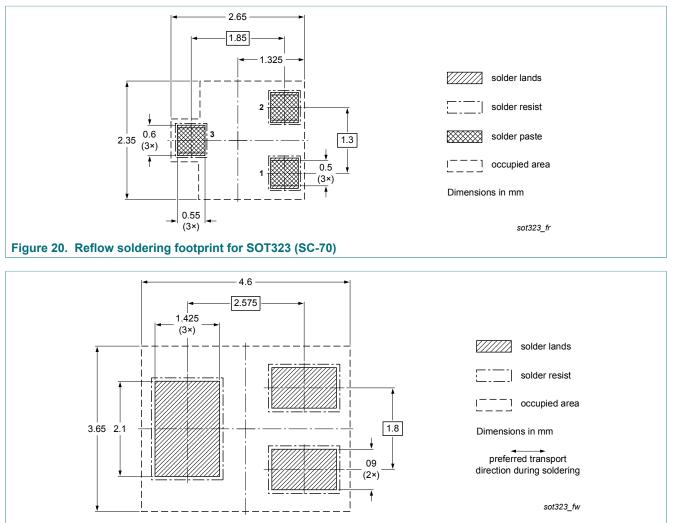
Wave soldering footprint for SOT323 (SC-70)
